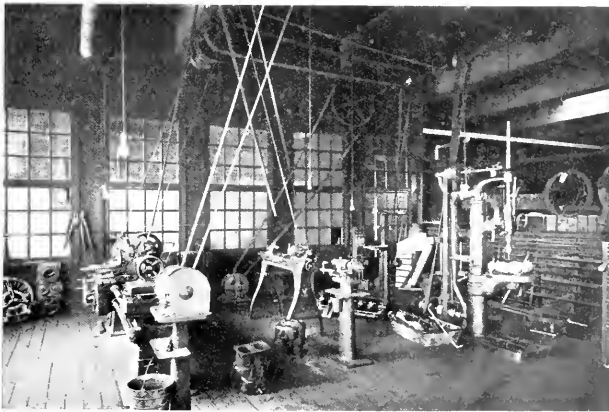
INDUCTION MOTOR DRIVING A GROUP OF MACHINE TOOLS
